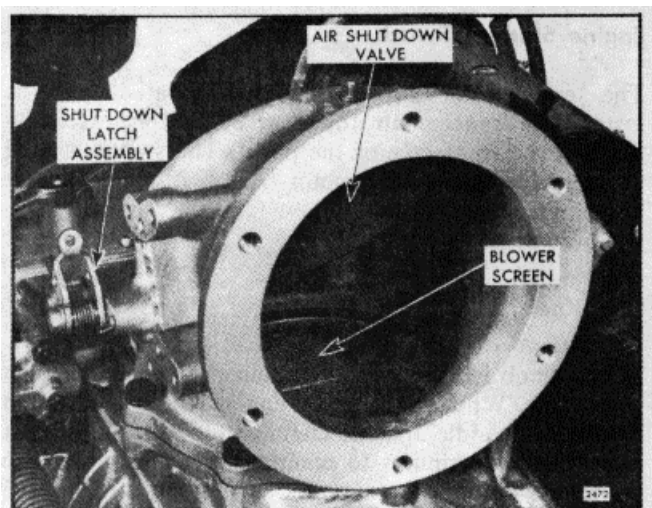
Manually Operated Emergency Engine Shutdown Valve Mounting
